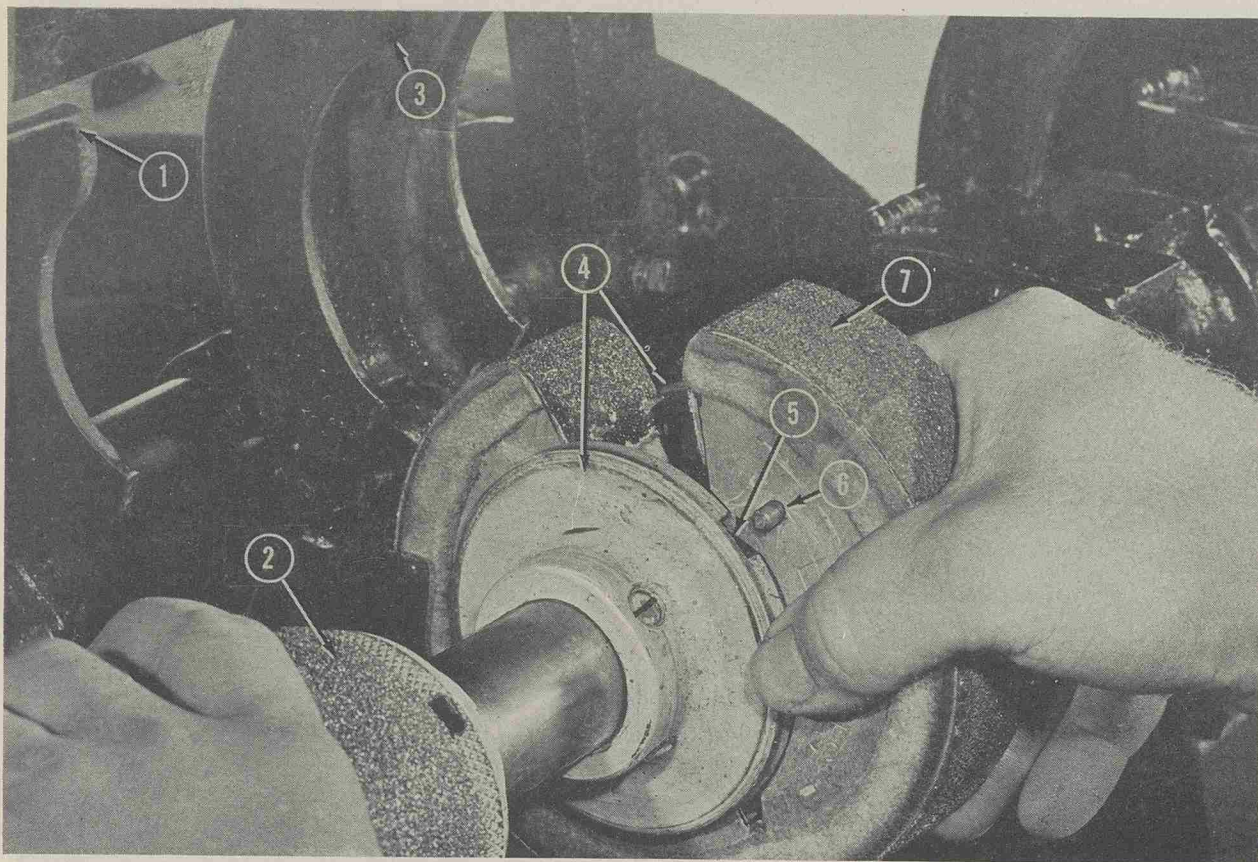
and the hood of the bottom sander (1). Turn upper shaft by hand until the opening joint of the heel sander is turned up and is facing the operator. Grasp bottom sander (2) with left hand to hold shaft securely. With right hand strike downward on lower segment of heel sander (7) to open segments in direction that shaft turns. When segments are loose in the collars (4) turn segments until segment pin (6) in segment coincides with notch (5) in collar. Lift segment up until the working space between the open ends of the segments is sufficient to remove paper. Lift ends of paper off the paper-retaining pins (1, 2, fig. 137) and remove paper from sanding wheel.
